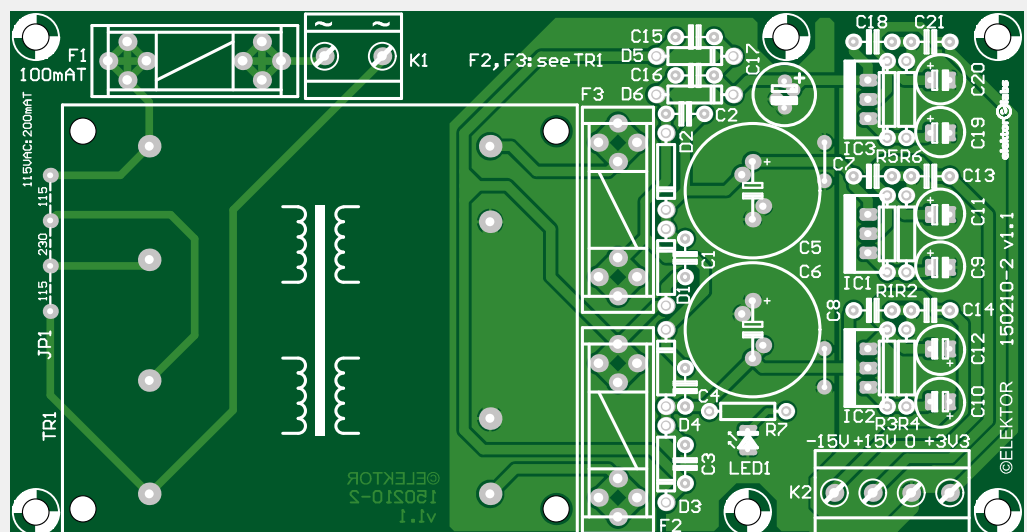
Component overlay of the power supply PCB (single-sided TH populated).
